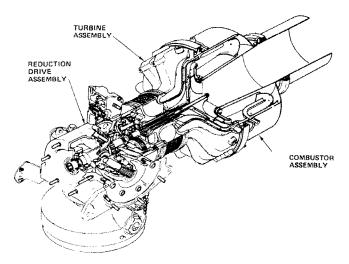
Auxiliary power unit (reproduced from TM 55-2835-205-23³⁷).
